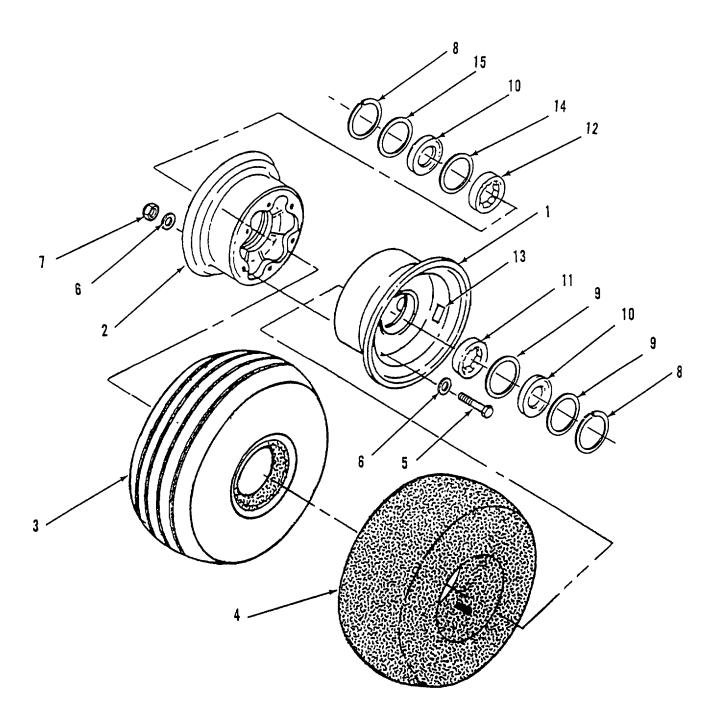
Wheel Assembly for Model 1730-EG-100
